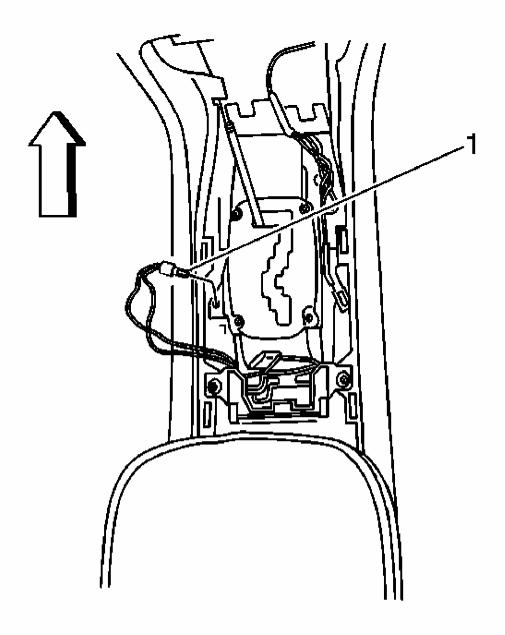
View of Shift Indicator Lamp Courtesy of GENERAL MOTORS CORP.
